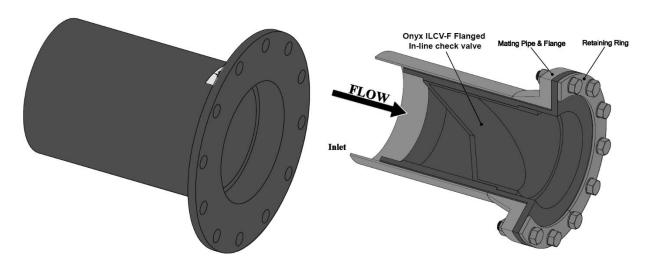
ILCV-F Flanged In-Line Rubber Check Valve
